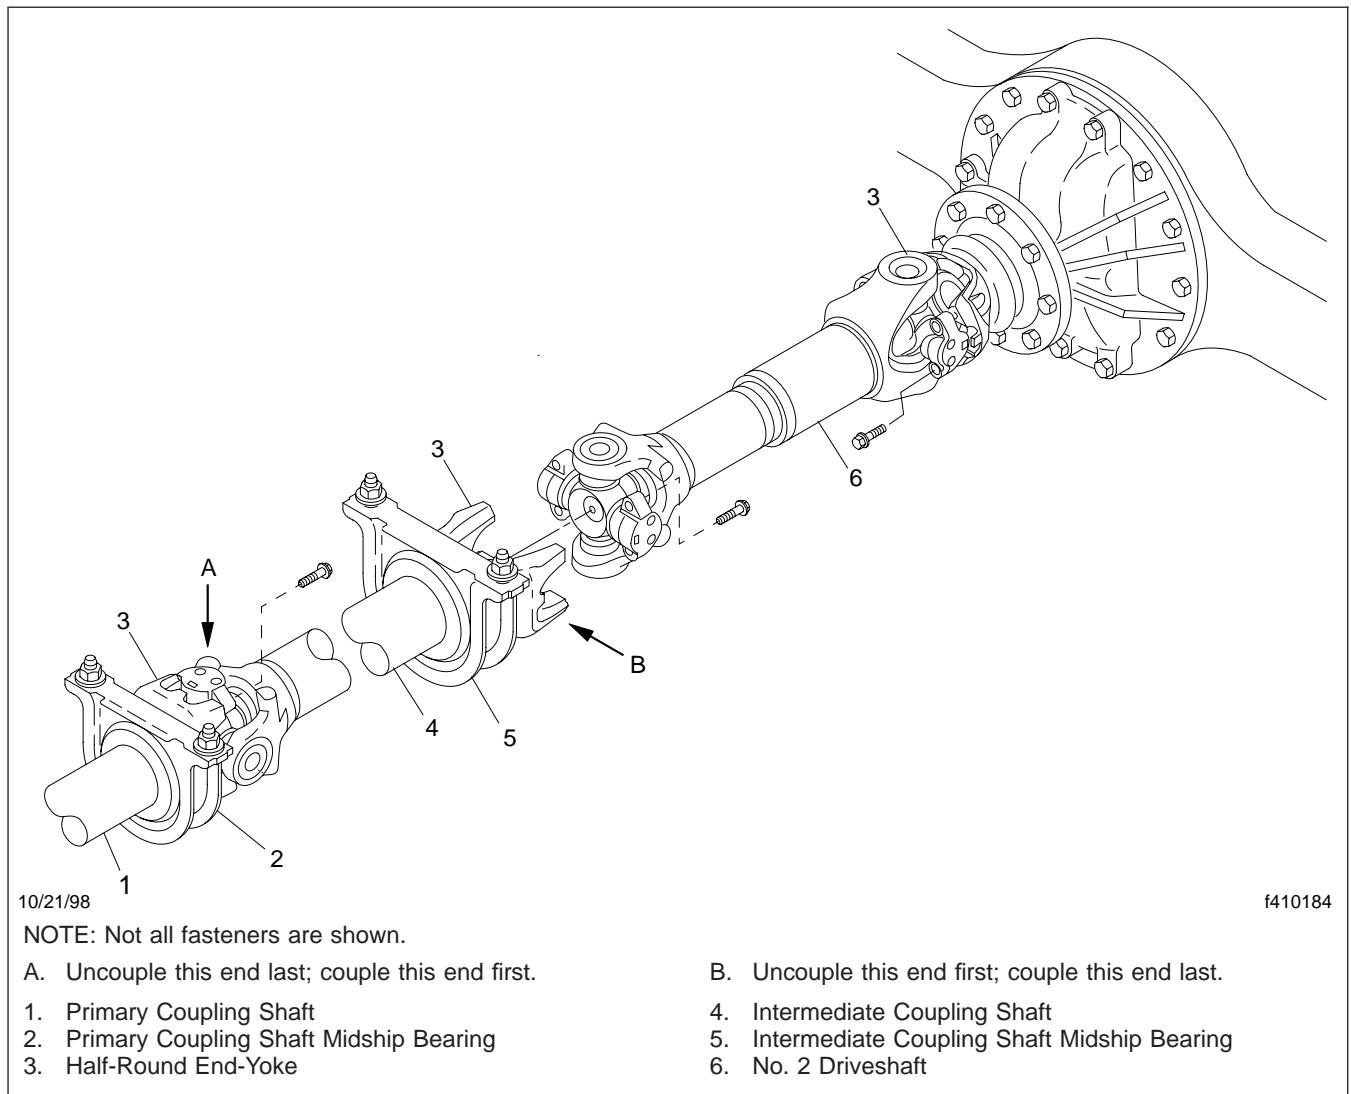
, Removal/Installation of an Intermediate Coupling Shaft With RPL U-Joints
